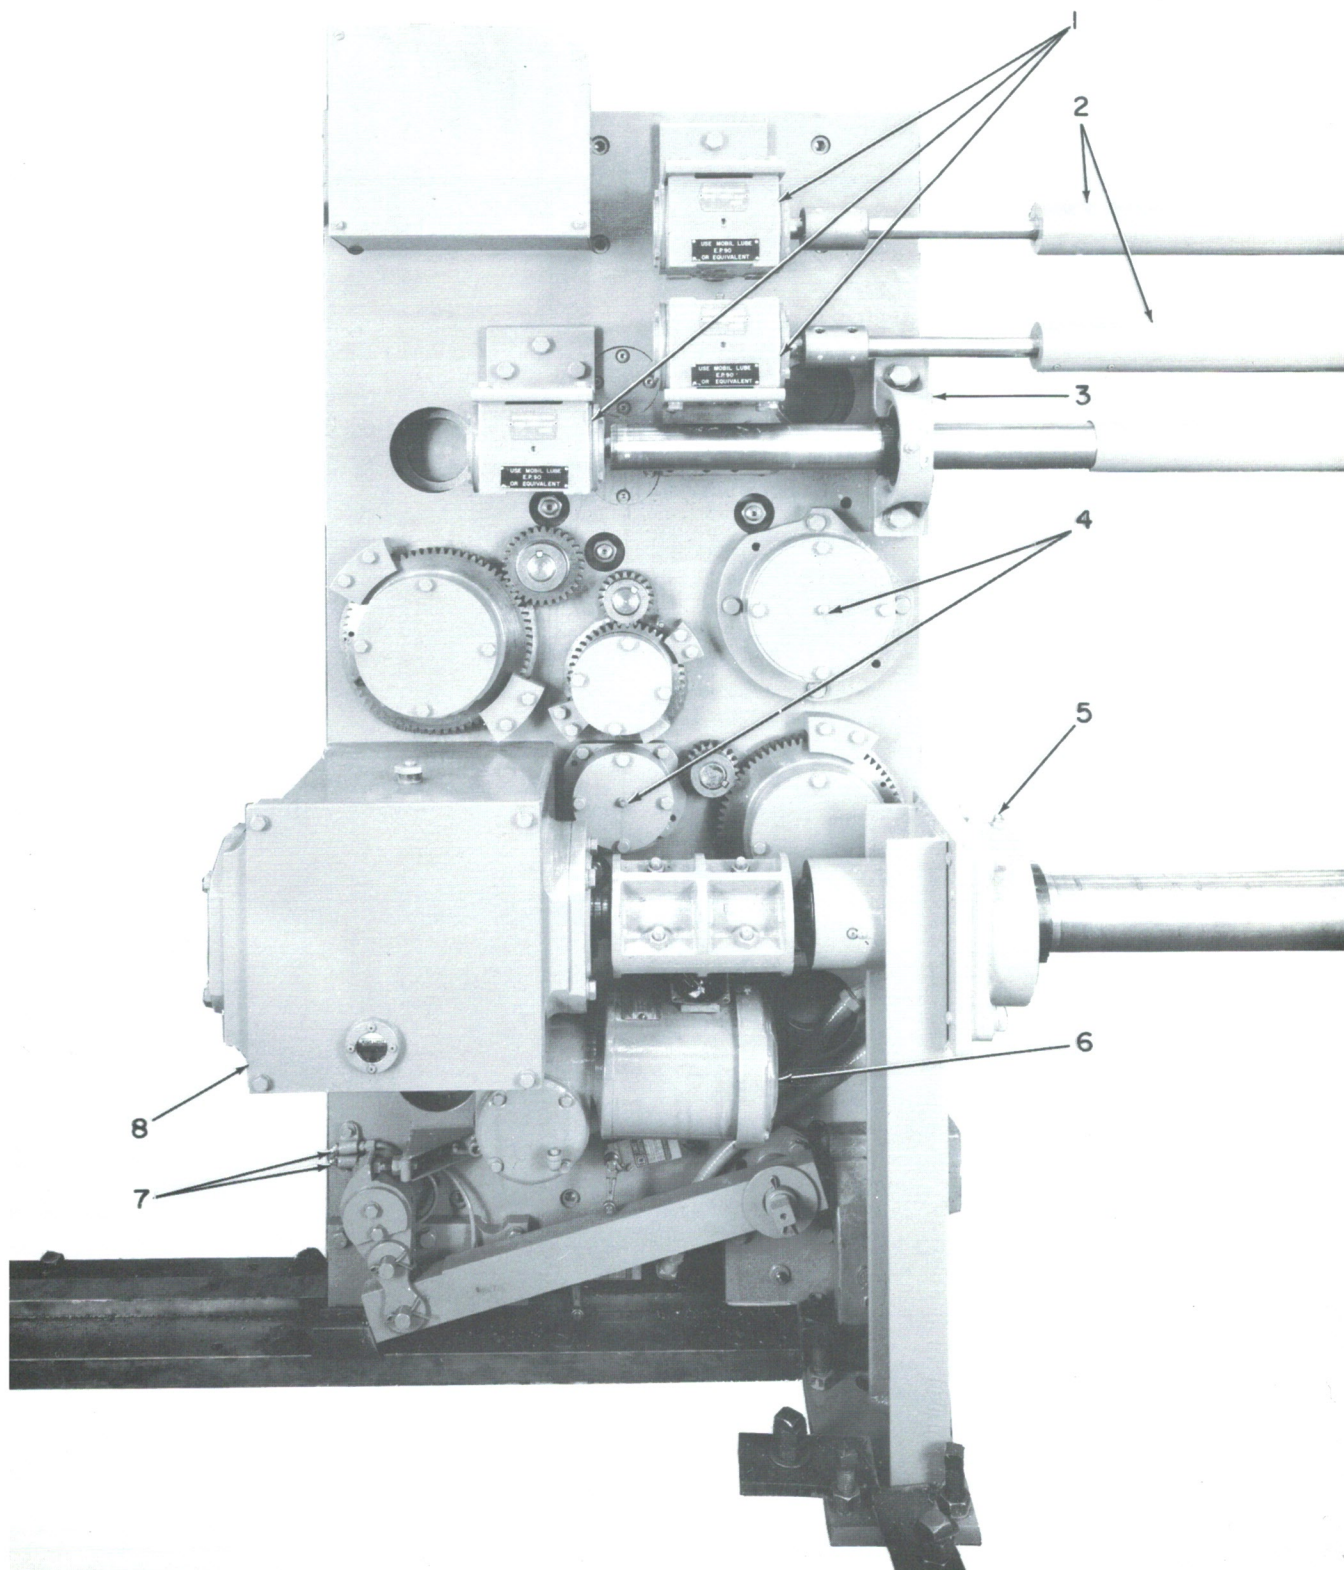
CREASER-SLITTER LUBRICATION, DRIVE SIDE VIEW
